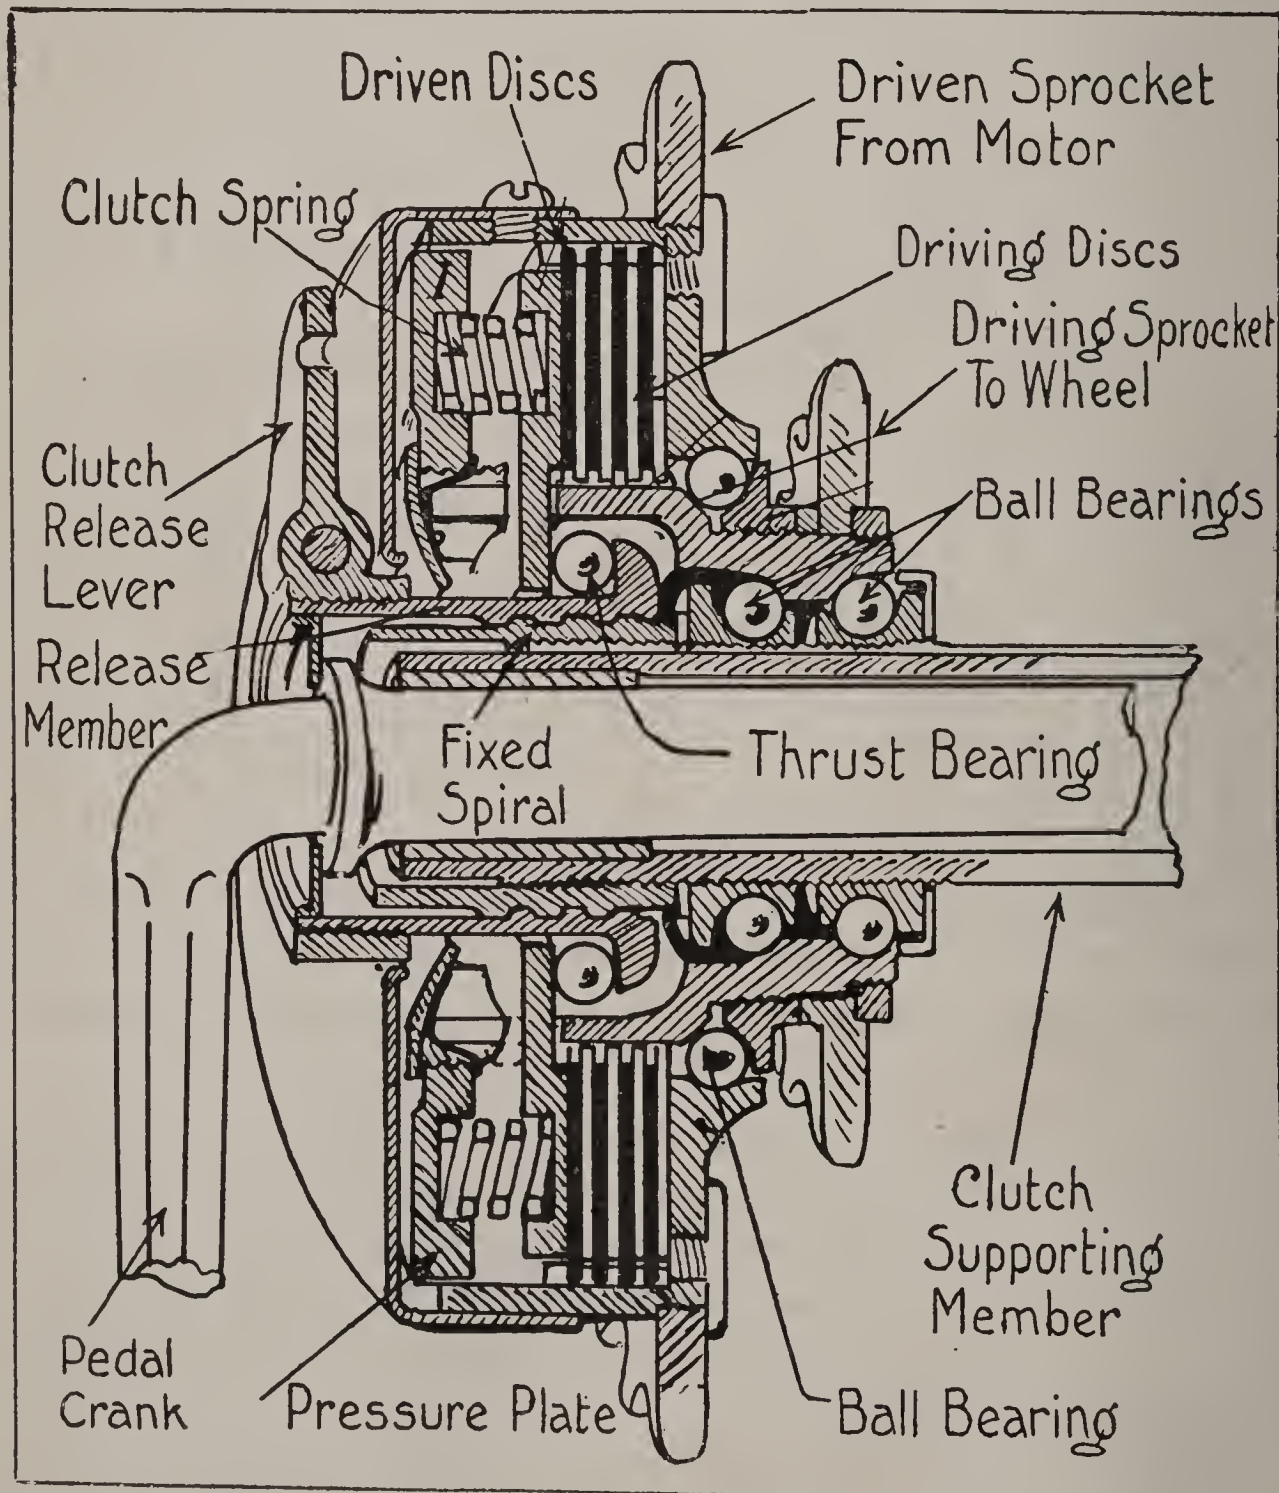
Sectional View of the Eclipse Countershaft Type Free Engine Clutch.
